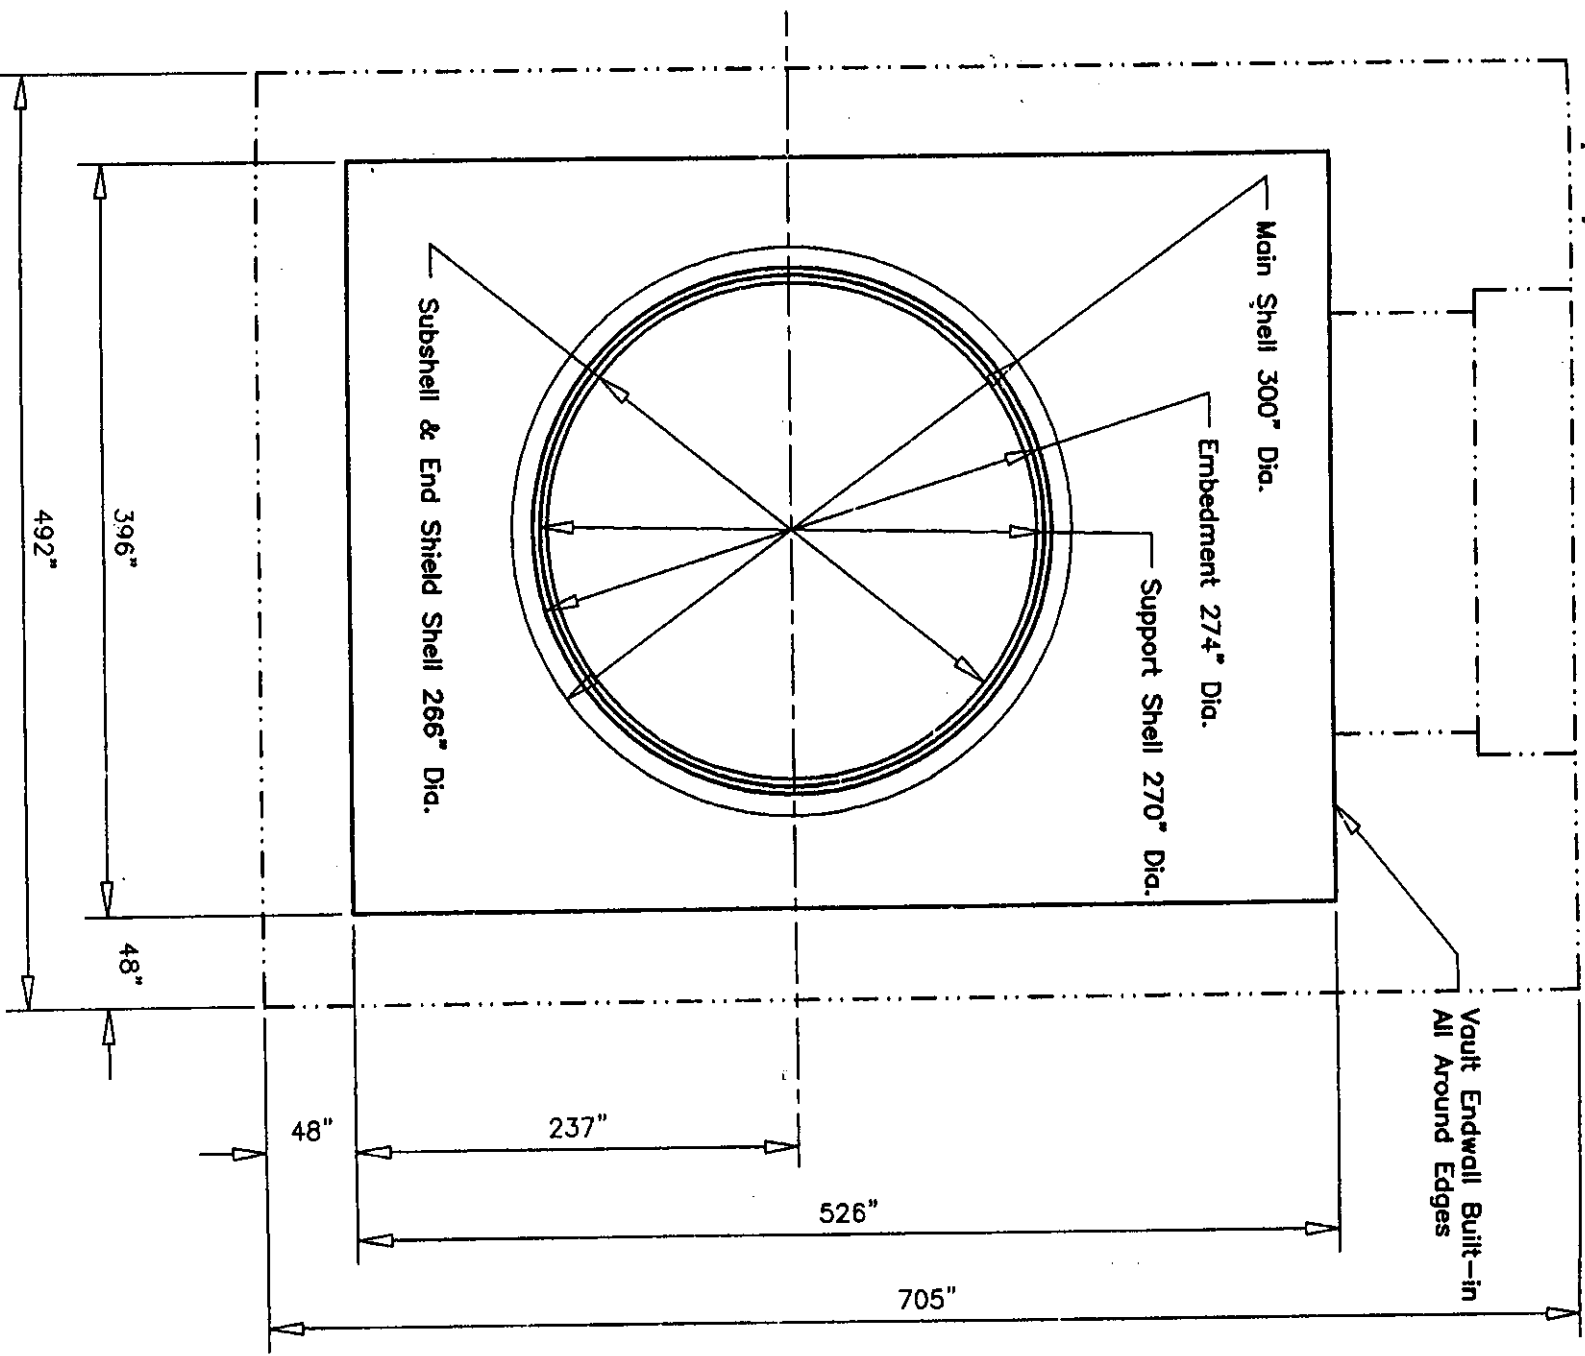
Dimensions of Present CANDU 6 Reactor Assembly
